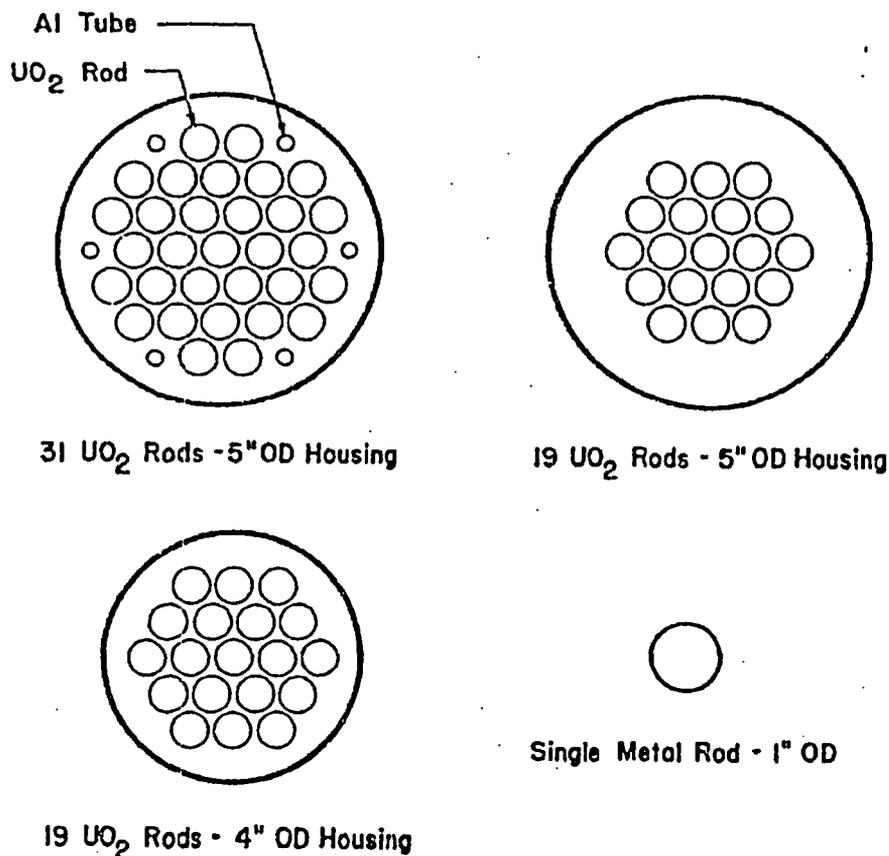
CROSS SECTIONS OF FUEL ASSEMBLIES
